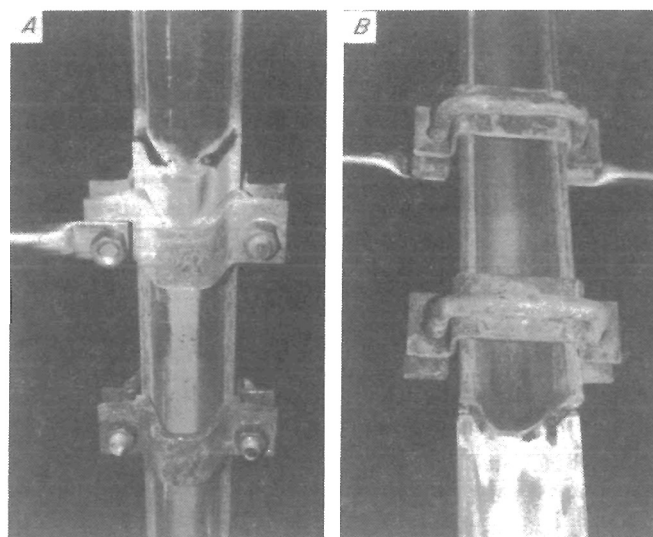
Welded U-bolt clamp assembly. A, Front view; B, rear view.
